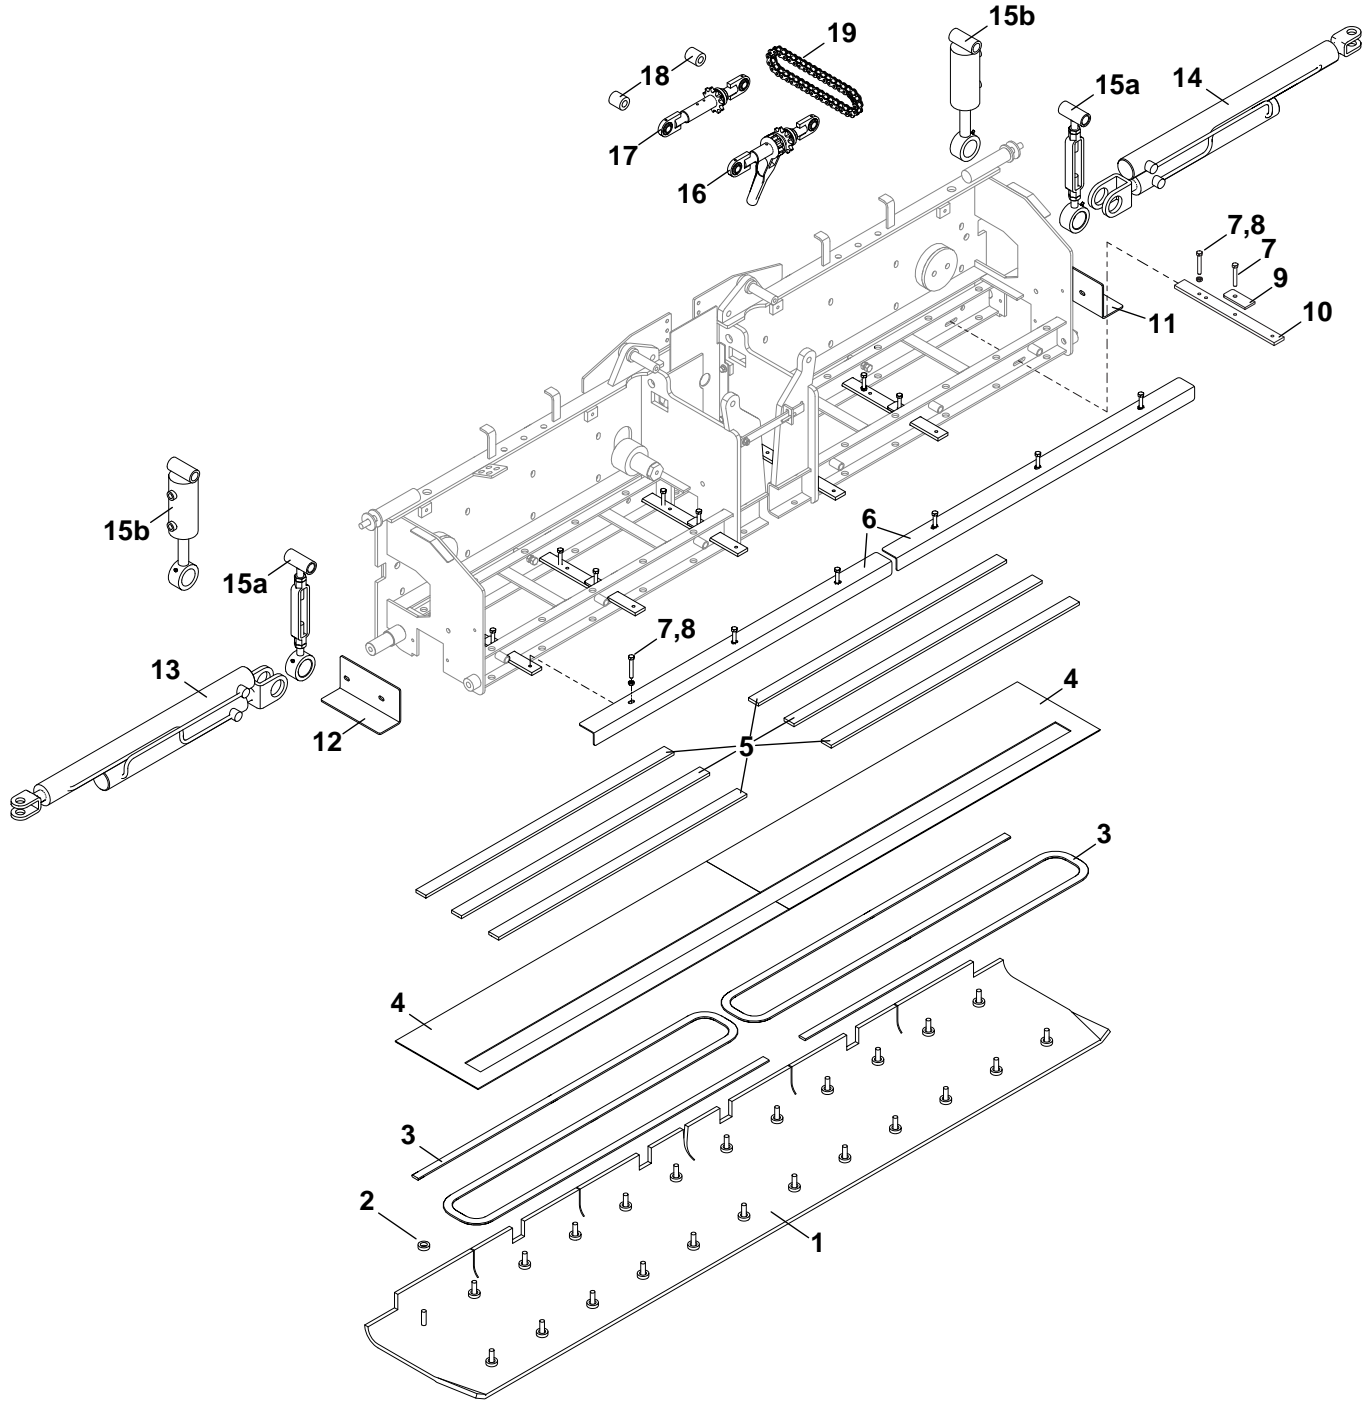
HD Screed Frame Assembly (2 of 2)
